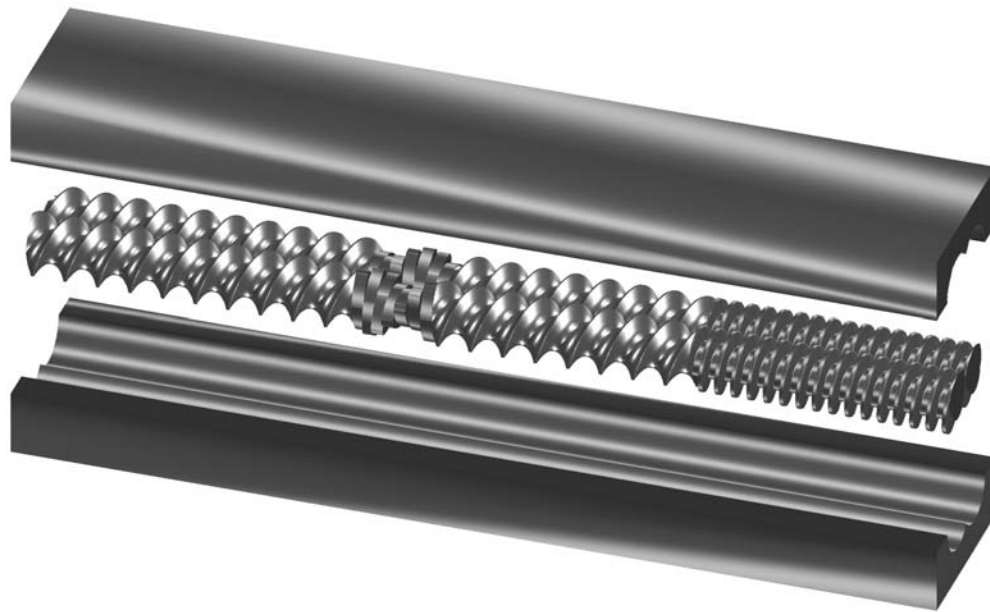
Exploded view of shaft and barrel of a co-rotating twin-screw extruder.
